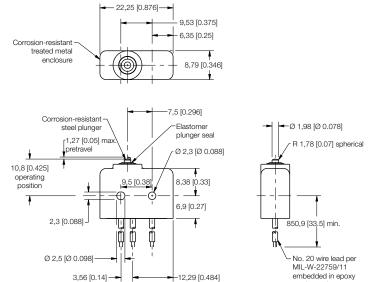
MICRO SWITCH™ SE Dimensions, Solder Terminal
